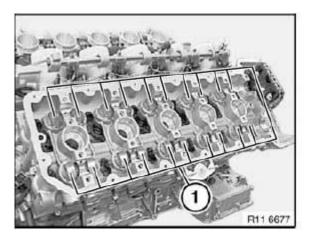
Identifying HVCA Elements Courtesy of BMW OF NORTH AMERICA, INC.
